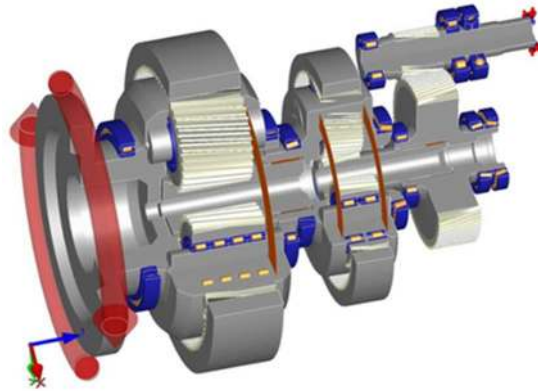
Typical Wind Turbine 3-stage Gearbox [31]
